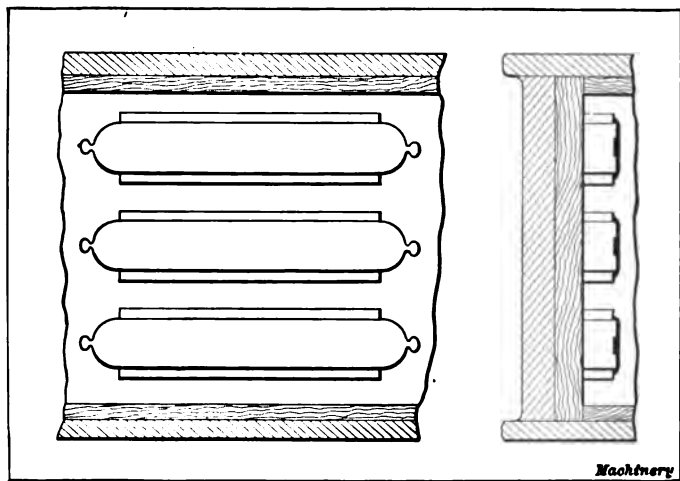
Section of Barrel to show Method of Mounting Large Work
